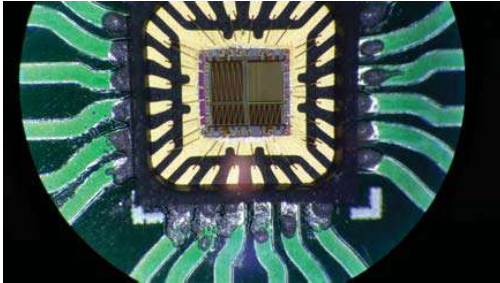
Die photograph, when mounted on a printed circuit board (PCB).
